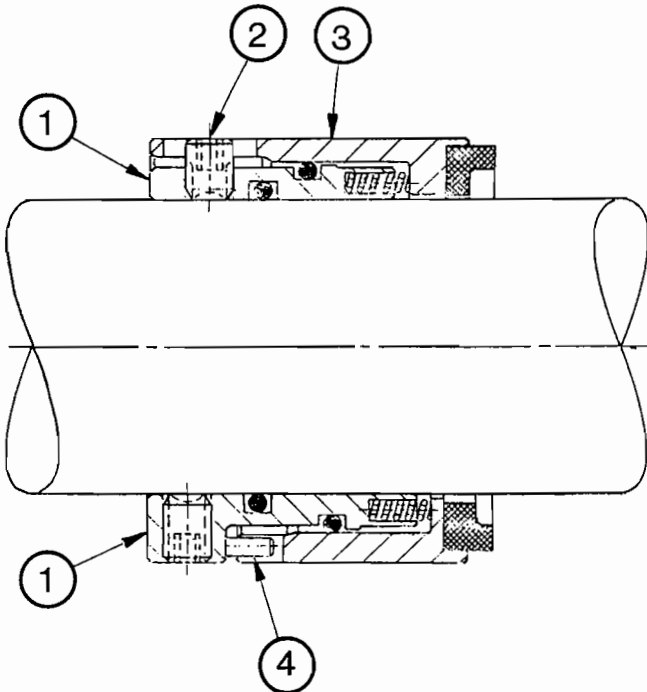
Lock Rings Differ in Strength; Top Half Shows Lock Ring (1), Executed with Set Screw (2), Engaging Carbon Holder (3). Bottom Half Reduces Potential Fretting by Using Heavier Lock Ring (1) and Axially Oriented Drive Pin (4).
